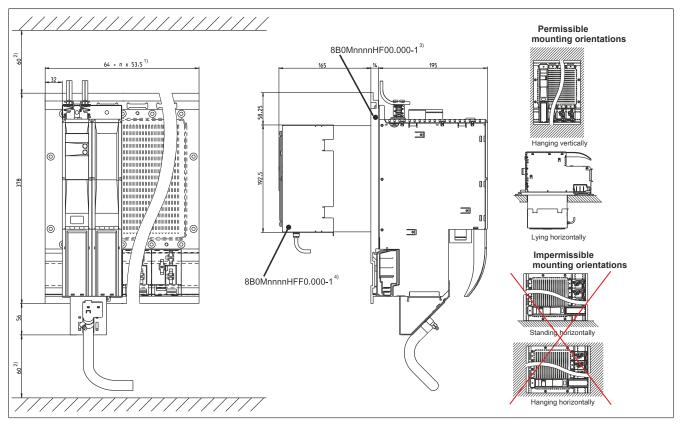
Feed-through mounting - Dimension diagram and installation dimensions
